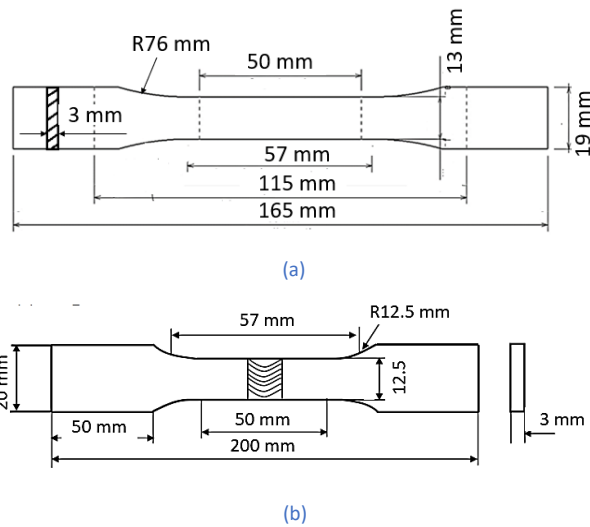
Schematic representation of specimen configuration used for a) PLA Aluminium (ASTM D638), b) Aluminium 6063 (ASTM E-8)
